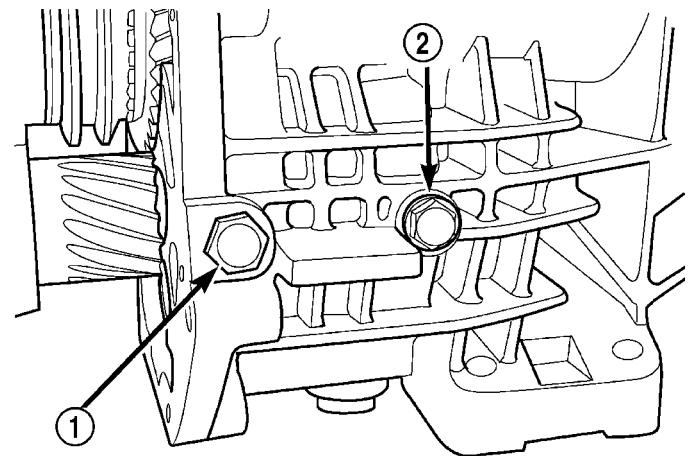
REVERSE IDLER SHAFT/SUPPORT BOLT
